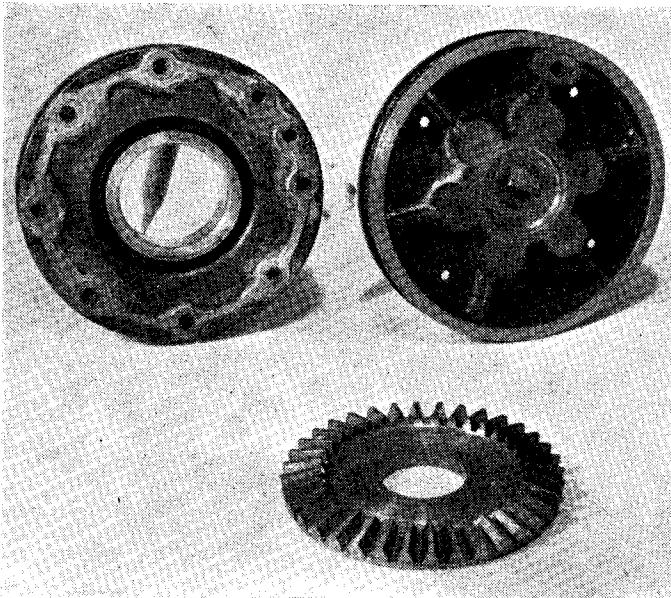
The slip-winding drum, brake drum and one of the bevels for the differential steering gear, the blank was first gashed out with a form-cutter, leaving about 20 thou. on each tooth flank for finishing. A hob blank was next turned from silver-steel, grooved, and the teeth so formed backed off. The finished hob was run between centres and the part-finished worm-wheel blank mounted on a stud carried from the cross-slide. By feeding the wheel blank forward, the hob was sunk into the blank and the teeth completed, giving a very good gear.
